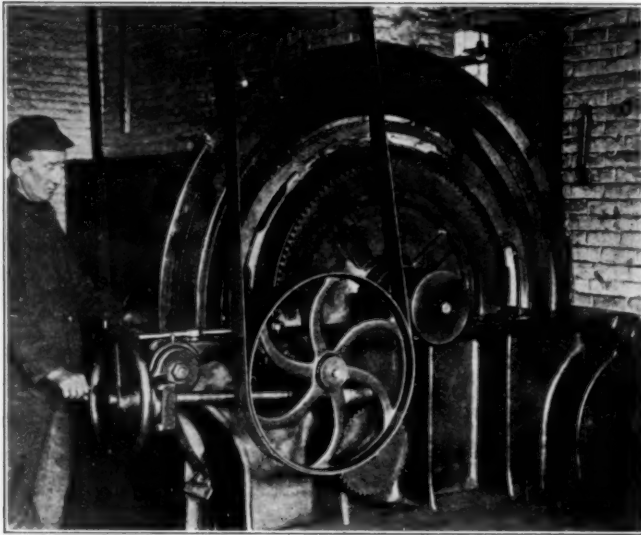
FLEXIBLE-BEND MILLING MACHINE
